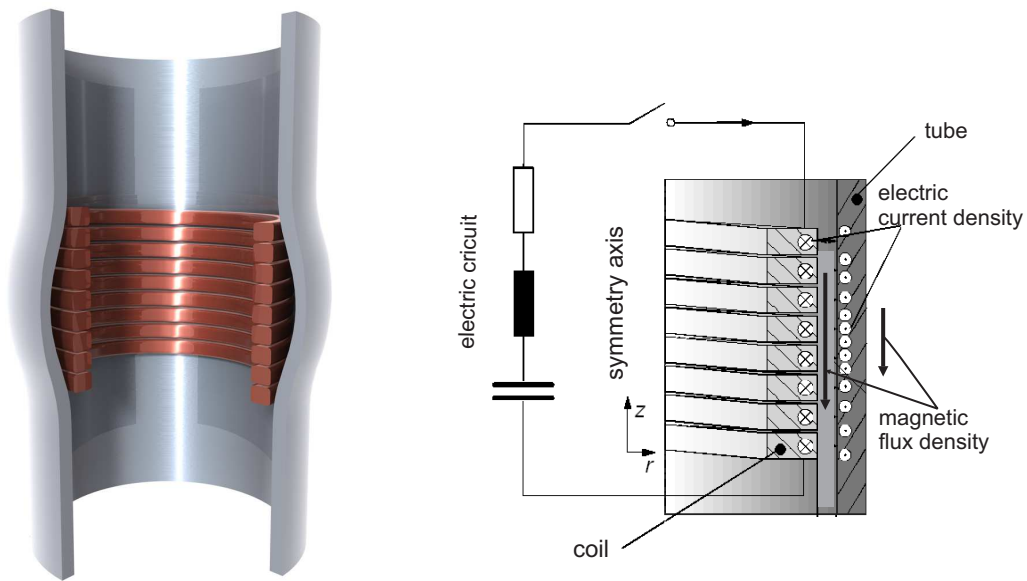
Electromagnetic (tube) forming. Left: 3D illustration of the workpiece (tube) and tool coil (copper windings). Right: Schematic axisymmetric 2D representation depicting the electric circuit, tool coil and workpiece as well as the magnetic flux and current densities in the workpiece and tool coil.
